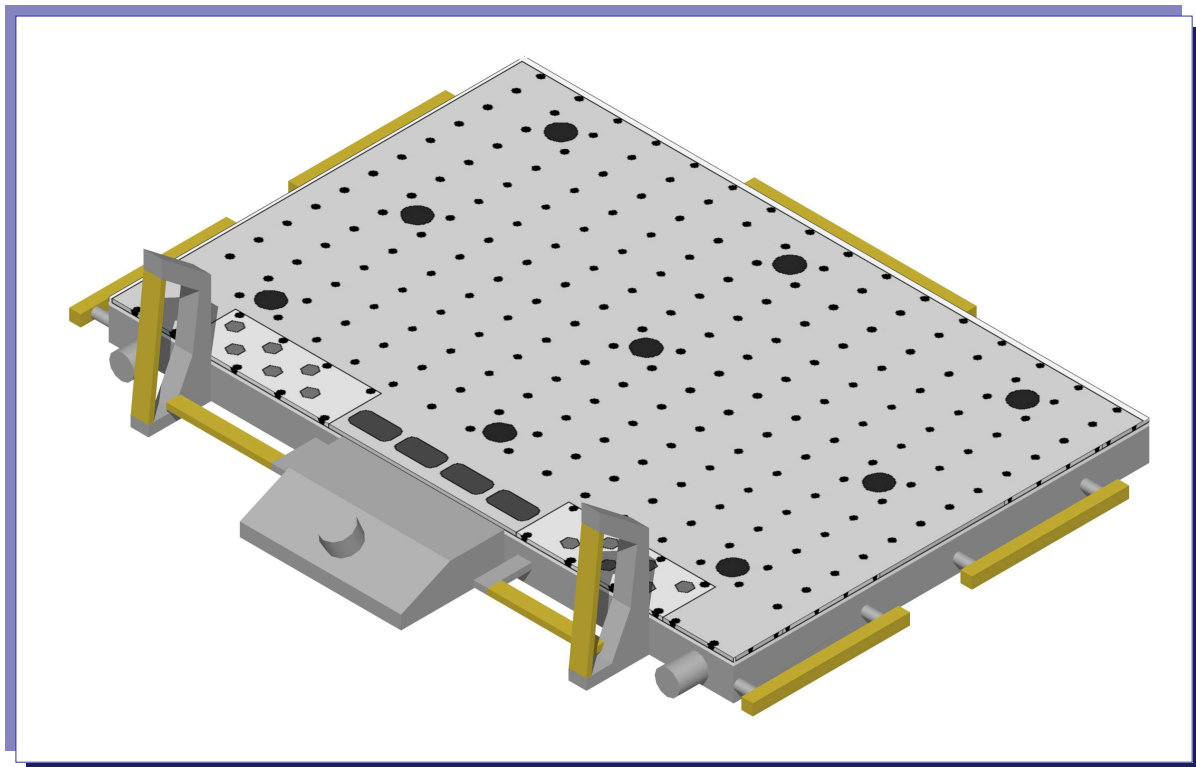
Columbus External Payload Adapter (CEPA) Assembly
